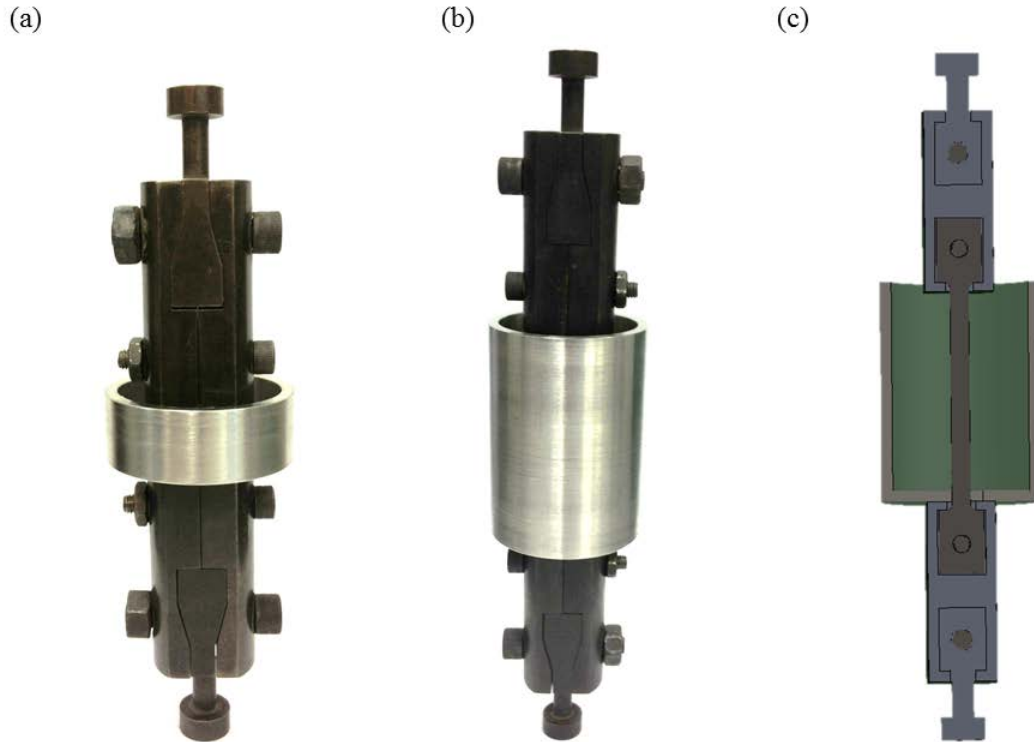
(a) Photograph of lead containment apparatus for standard miniature geometry (Figure 4.1b), (b) Photograph of lead containment apparatus for long miniature geometry (Figure 4.1c), and (c) cutaway SolidWorks model of the lead containment apparatus.
